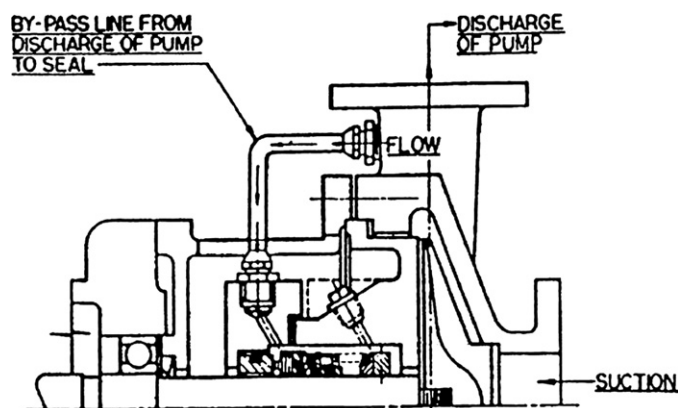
• Liquid seal flush (Courtesy of John Crane Co.)
